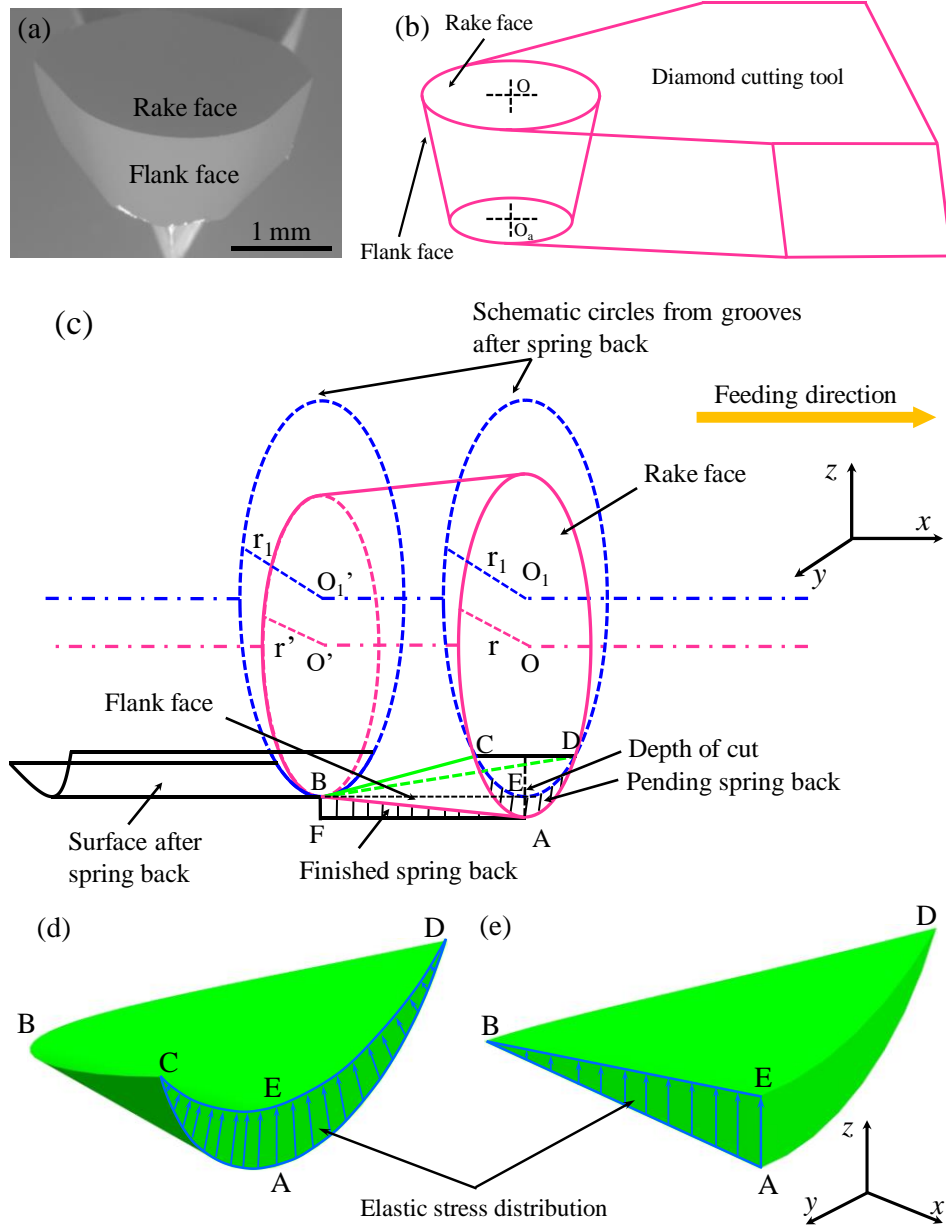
The diamond cutting tool of the (a) SEM morphology and (b) brief schematic drawing; (c) geometry illustration of material spring back during groove and cutting; elastic stress distribution in (d) rake face and (e) flank face of the diamond tool
